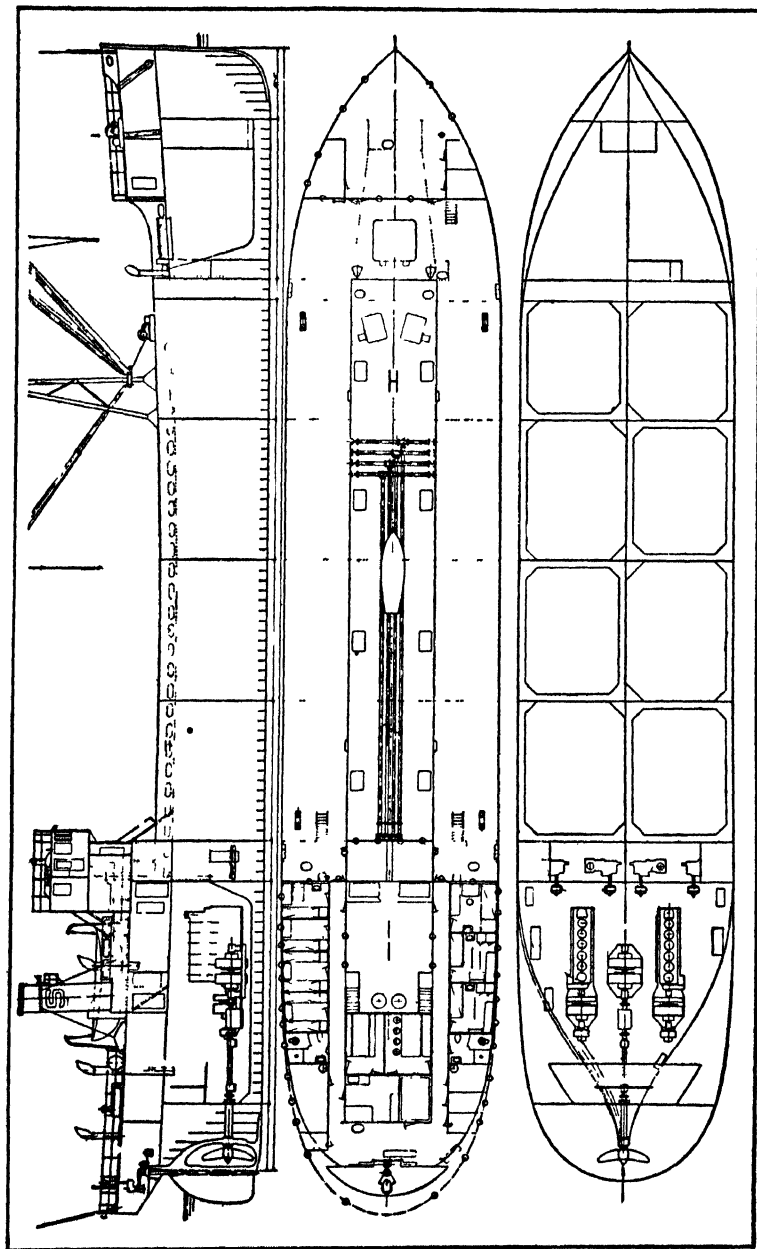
Plan and Elevation of Tanker "Standard Service"
